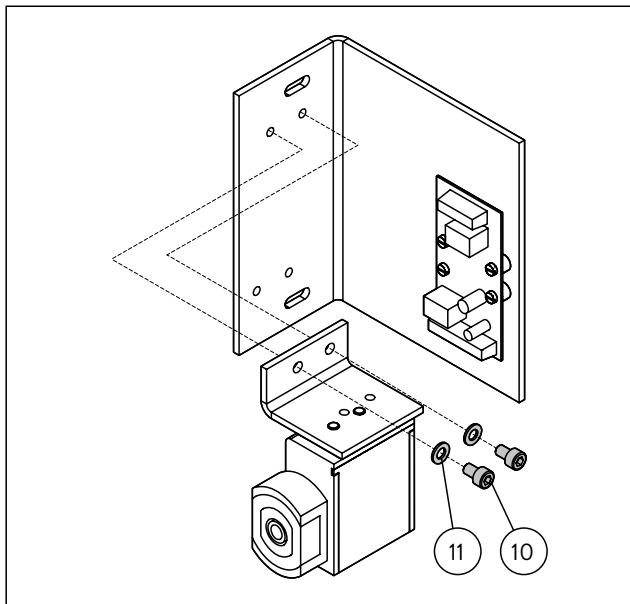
Screwing the hold-open magnet onto the fixing bracket
